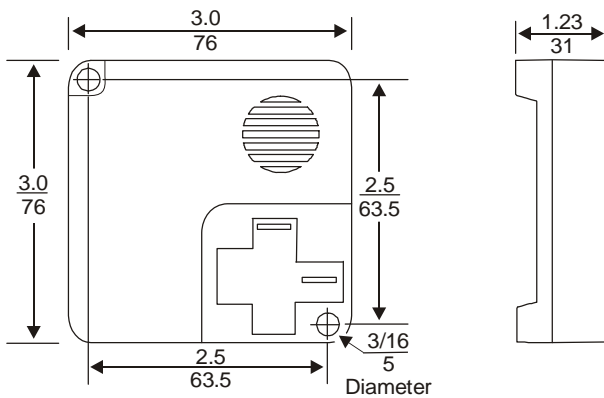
TE-637DP-1 Dimensions, in. (mm)
